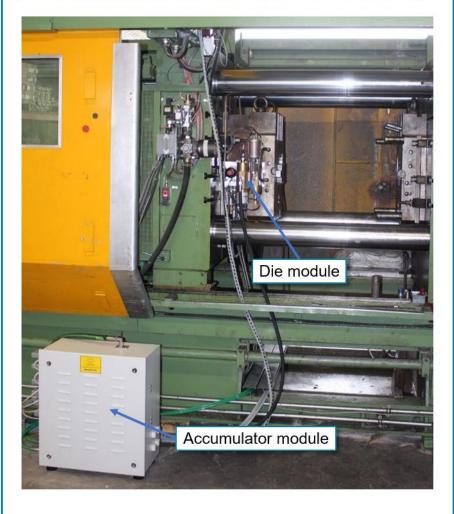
Real layout of the new gas injection system with a compressor module, accumulator module and die module on a cold chamber die casting machine.
